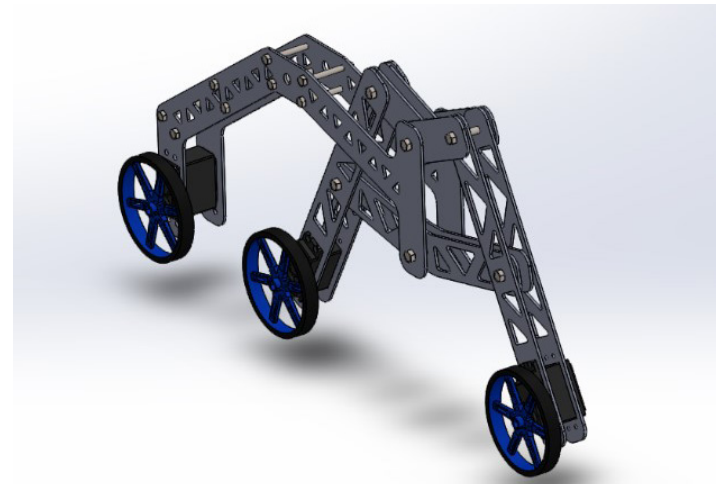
Representation of double layer of sheet aluminum. To make the robot more resist able to axial loads, it was decided to use double layer of sheet aluminum.
